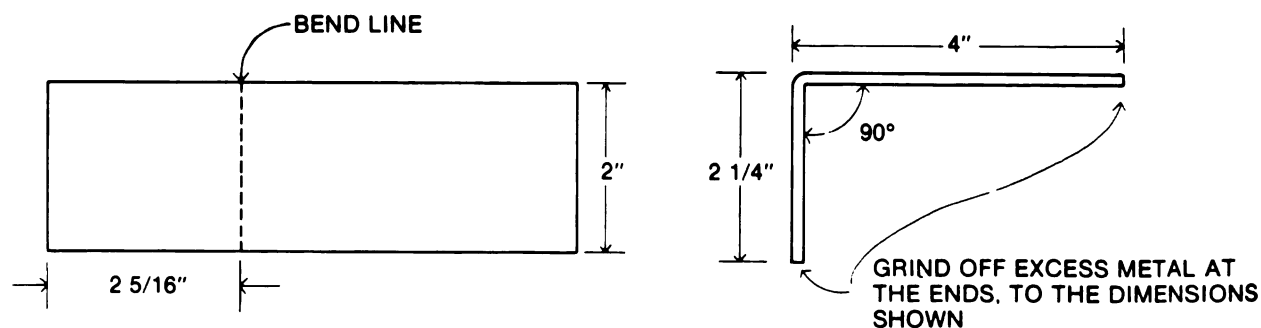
Rectangular piece of copper for "guard plate."
